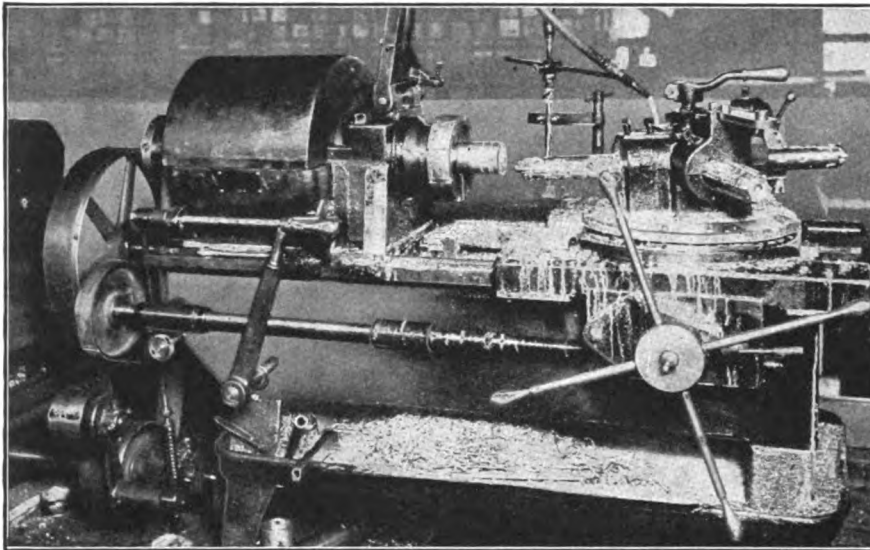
SPECIAL-PURPOSE "BLOOD" LATHE FOR 3-IN. AND SMALLER SHELLS
